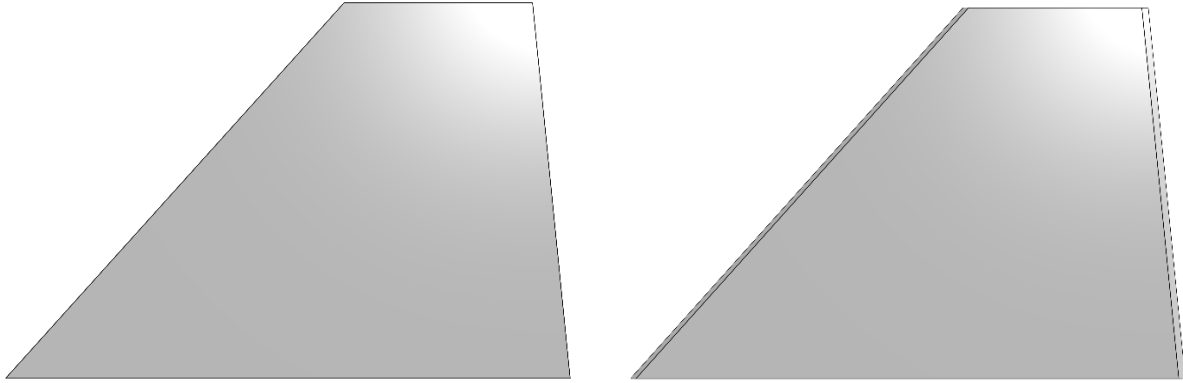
Trapezoidal Fins. LEFT: Rectangular cross section (RT). RIGHT: Diamond cross section (DT).
